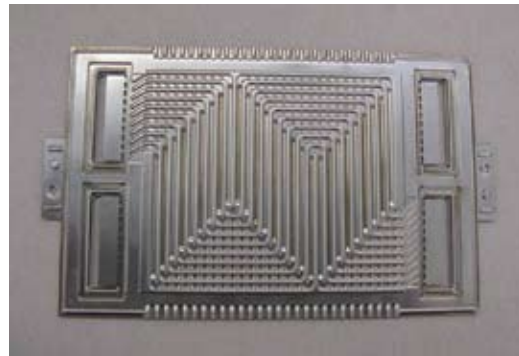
Example of precision welding a 200 µm thick foil with a TruFiber 400 laser.
